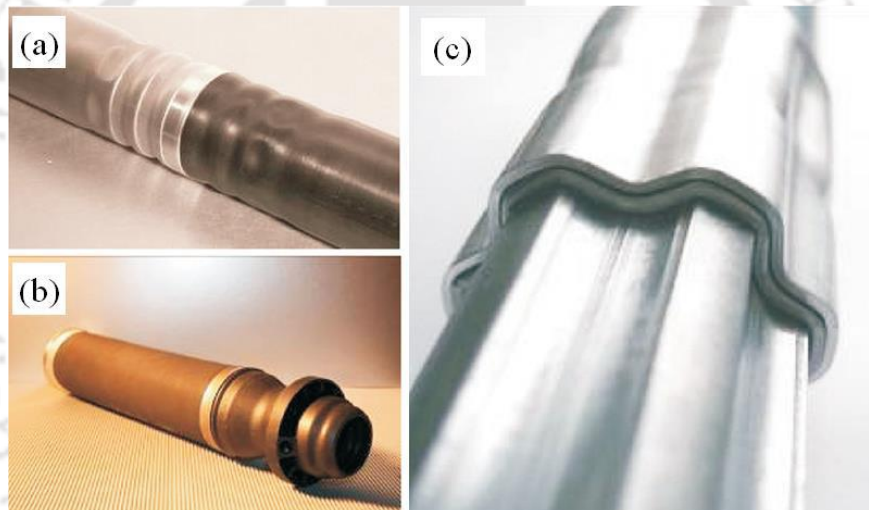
(a) Al/steel crimped tube for instrumental panel beam (b) crimped air suspension, (c) crimped drive shaft [39]
